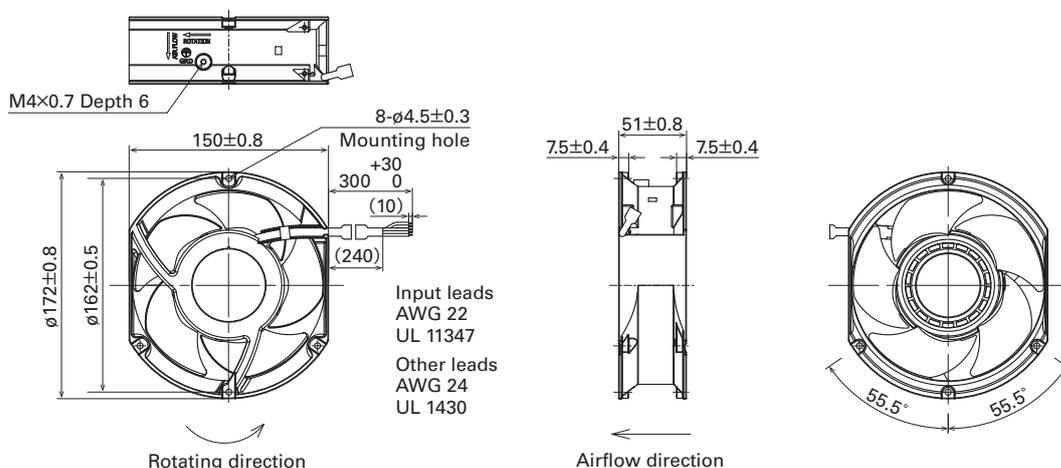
Dimensions of the *San Ace 172AD 9ADW* type (Unit: mm)
